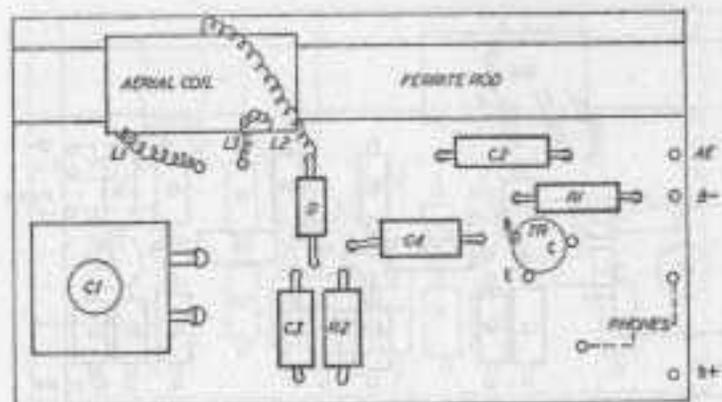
COMPONENT LAYOUT FOR DESIGN NO. 5 (CIRCUIT DIAGRAM, FIG. 31) FOR PRINTED CIRCUIT ASSEMBLY.
